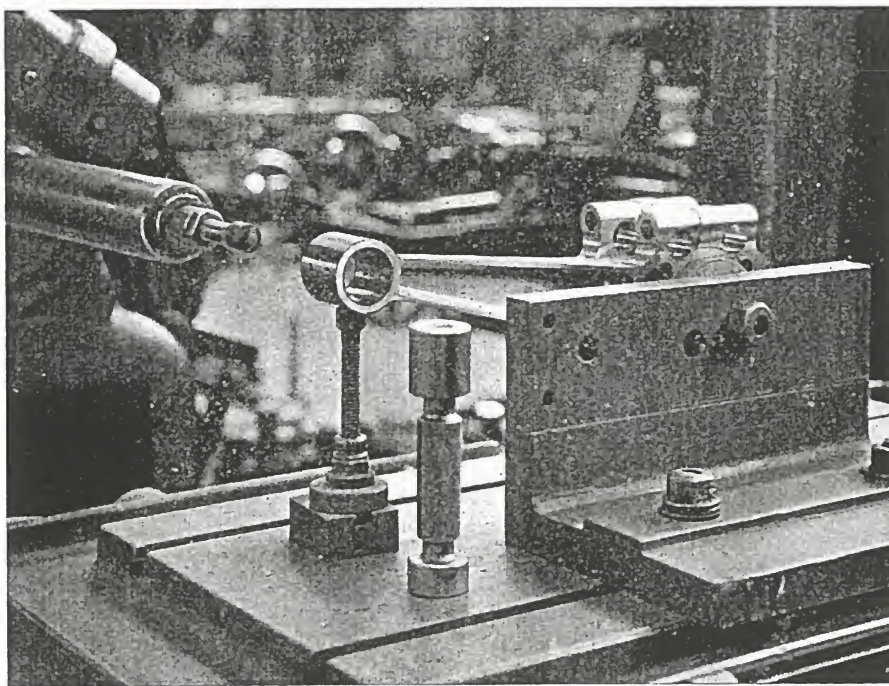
PLATE XVI. GRINDING THE EYE END OF A CONNECTING ROD
